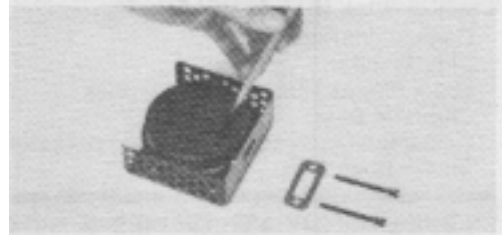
Check port area on muffler assembly for excess carbon deposits.
